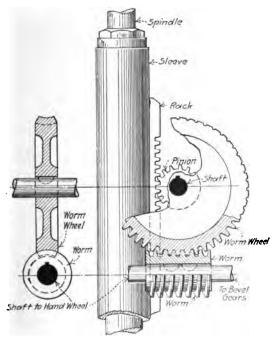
Shows worm, wormwheel and rack for moving the spindle sleeve and spindle to feed the cutting tool.
